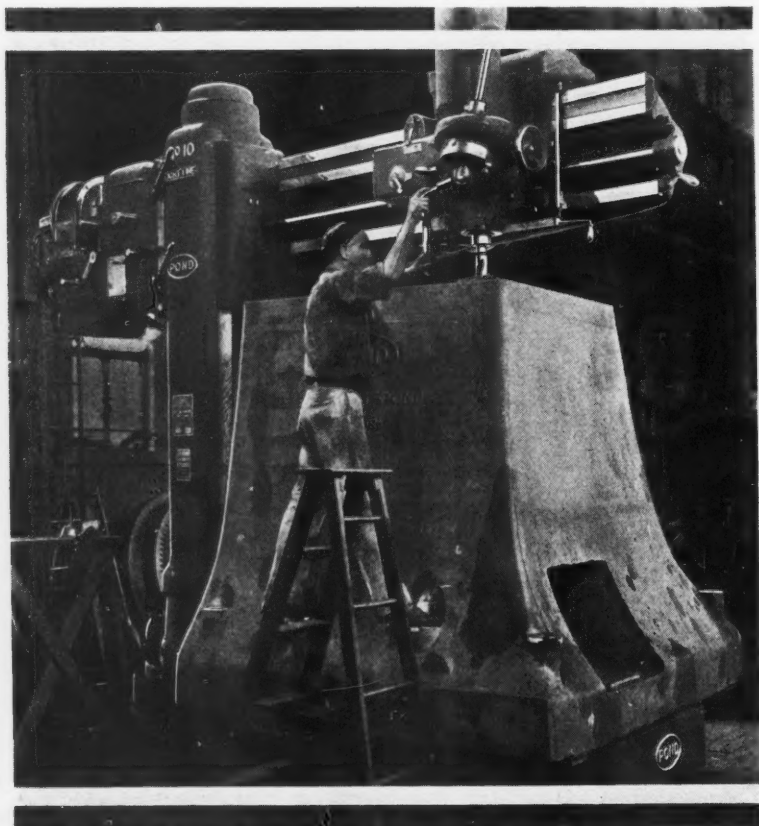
A Niles Radial Drilling Machine Drilling a 2 1/2-inch Hole in the 17,000-pound Tailstock Base for a 168-inch Swing Engine Lathe. This Lathe, for the Ford Plant at River Rouge, is One of the Largest Lathes Ever Built
